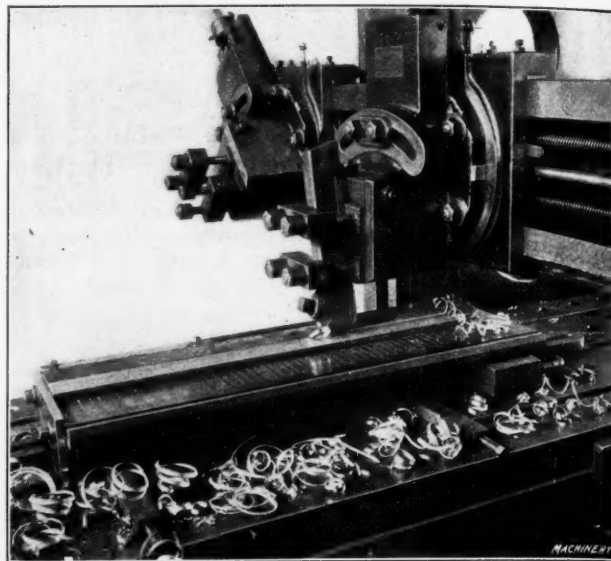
Rectangular or Planer Type of Magnetic Chuck
